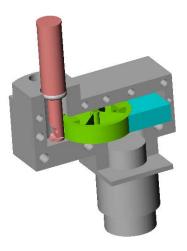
Cut-Away View of the X-43 Mach 10 Skin Friction Gage.
